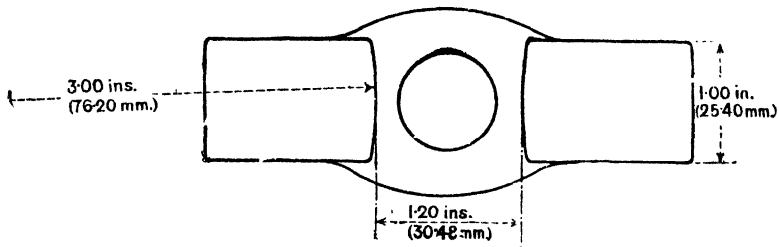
ELEVATION AND PLAN OF JAWS FOR HOLDING BRIQUETTE.
